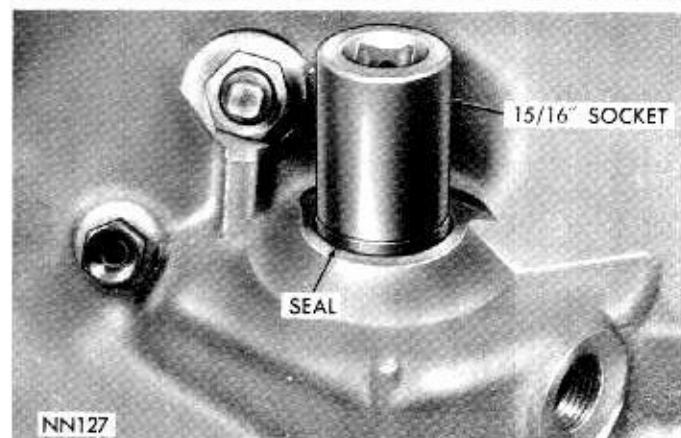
Installing Valve Body Manual Lever Shaft Oil Seal
